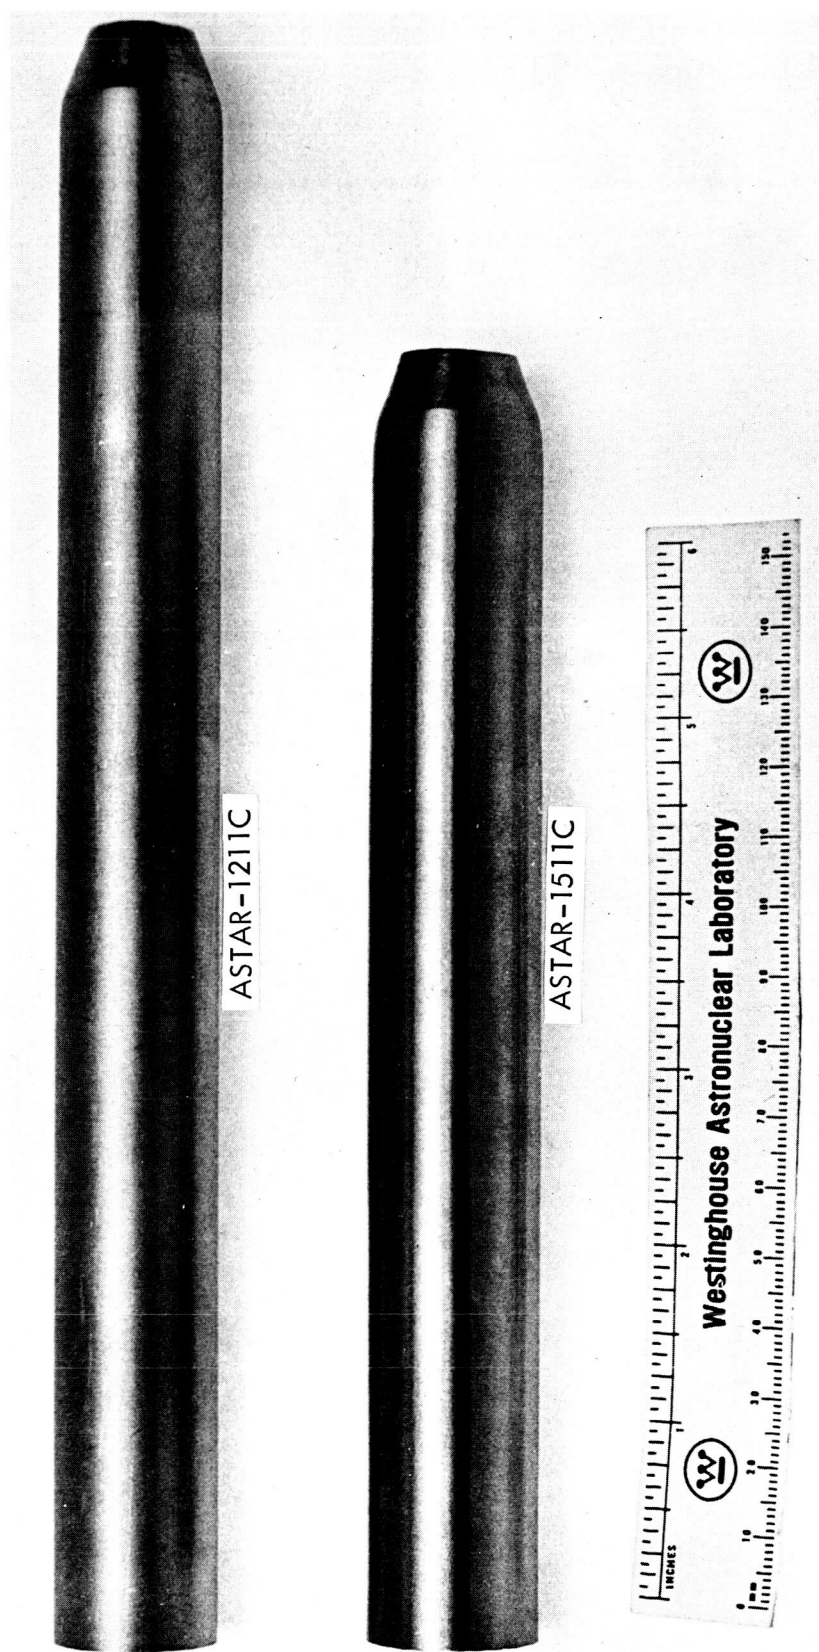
ASTAR-1211C and ASTAR-1511C Tube Blanks Pointed by Hydrostatic Extrusion
